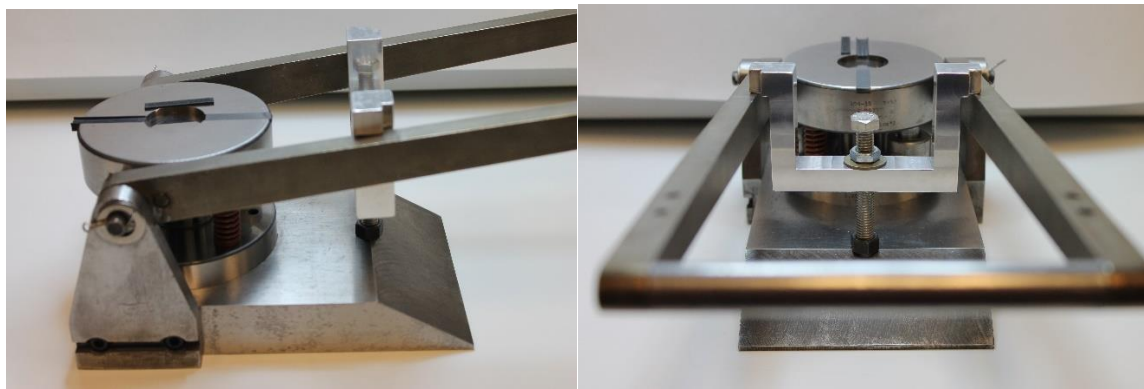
Stripping fixture, pellet die, and stripping arm stay setup
